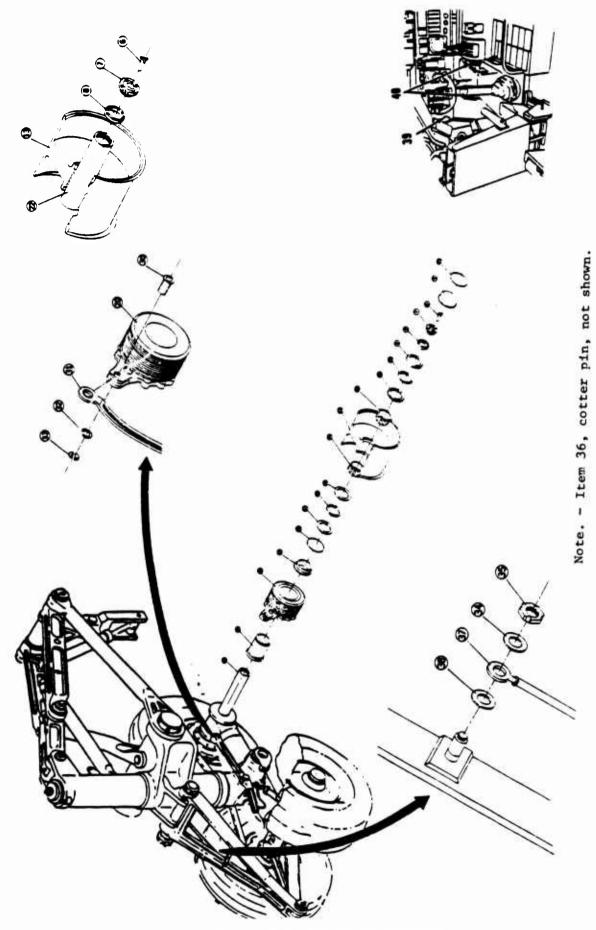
C-141 WHEEL AND BRAKE ASSEMBLY 150
